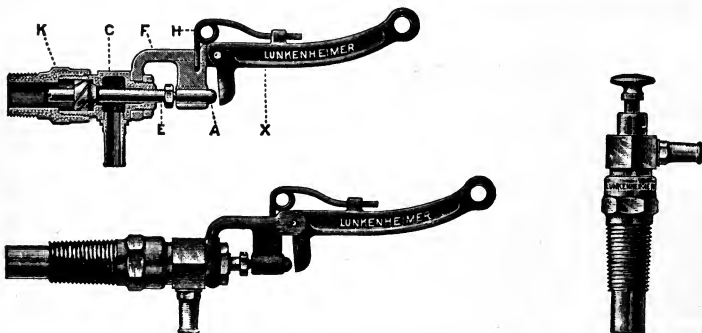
,737. — *Spring* cock; long shank push button or "Mississippi" pattern.
